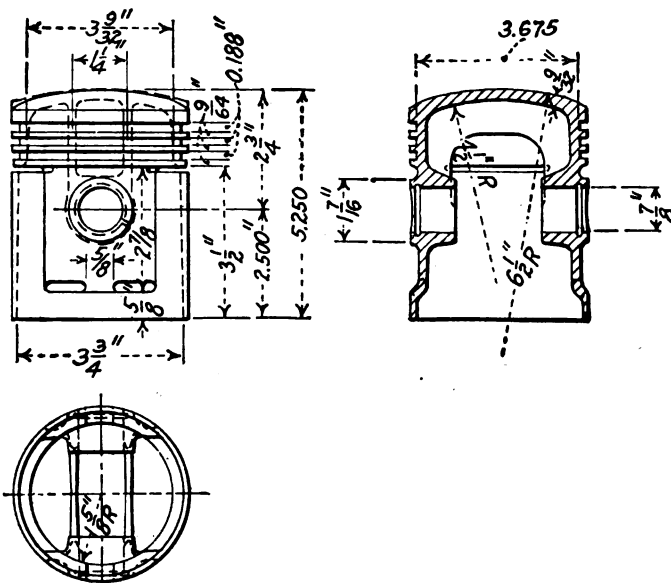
IN THIS PISTON THE MECHANICAL EXPANSION DUE TO THE HEAD IS TAKEN CARE OF BY RELIEVING THE SIDES
